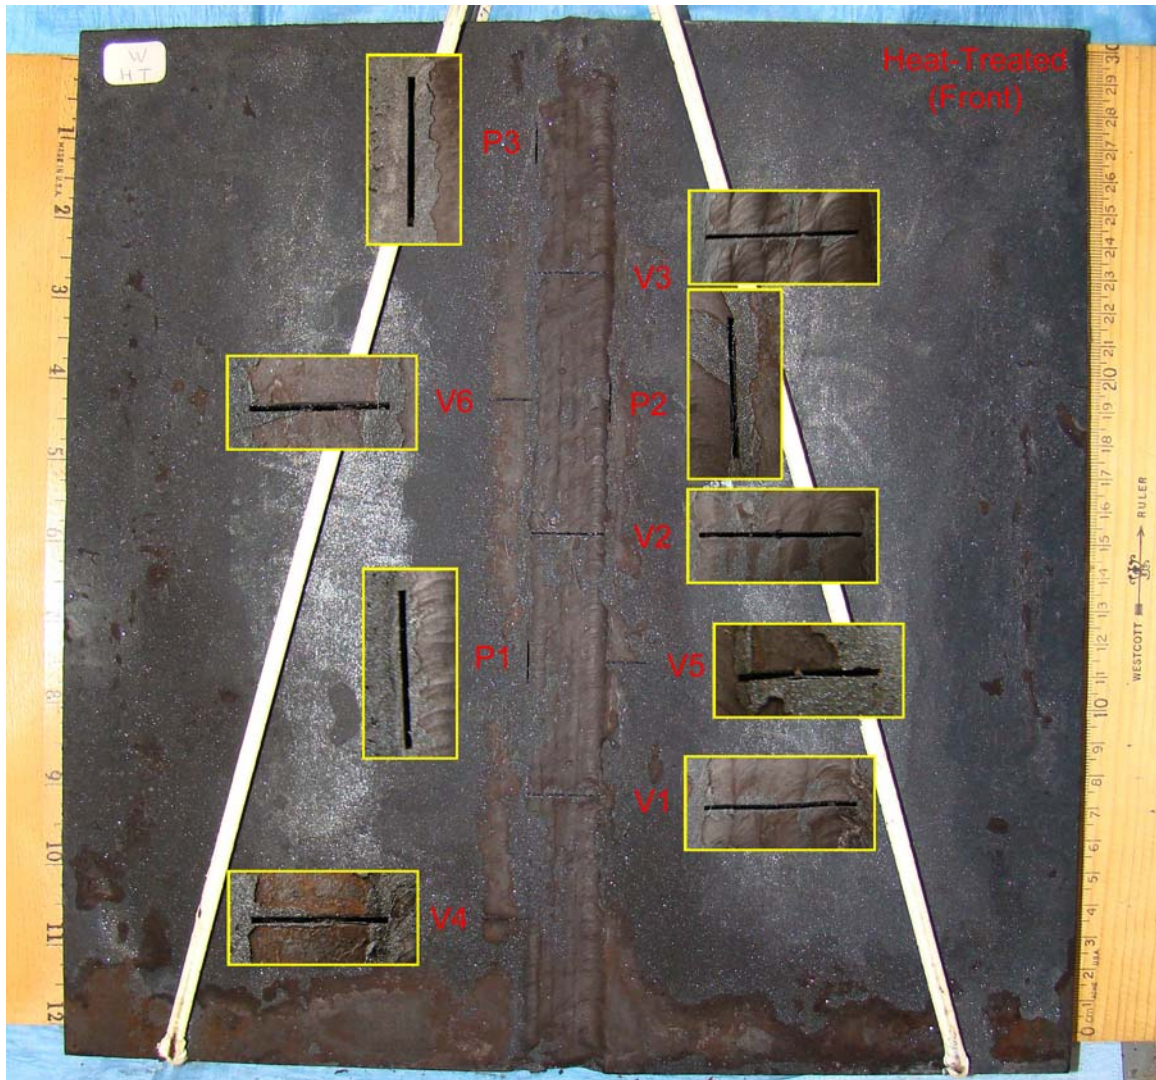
Heat-treated plate after exposure to test solution for 12 weeks (Front side, insets show close-up of the machined cracks).
